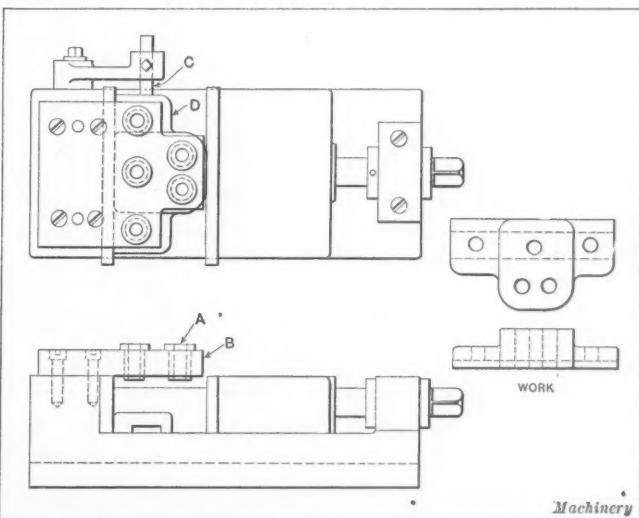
Drilling Several Holes with a Templet attached to Vise
